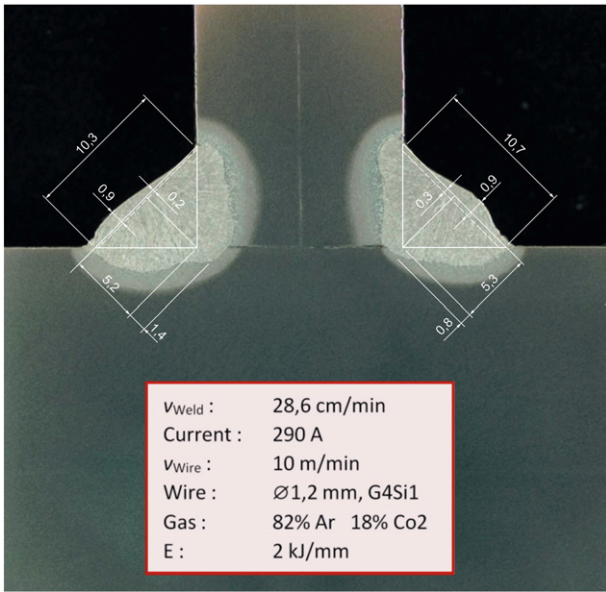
Transverse macrosection for laboratory sample and dimensions of fillet welds (quality level B, EN ISO 5817).
